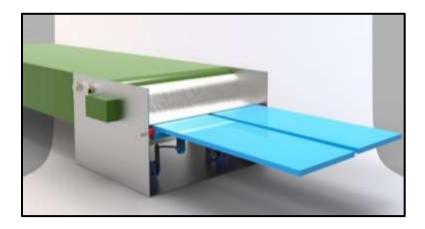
Prototype V2 Flap Assembly integration with conveyor belt (Render)
